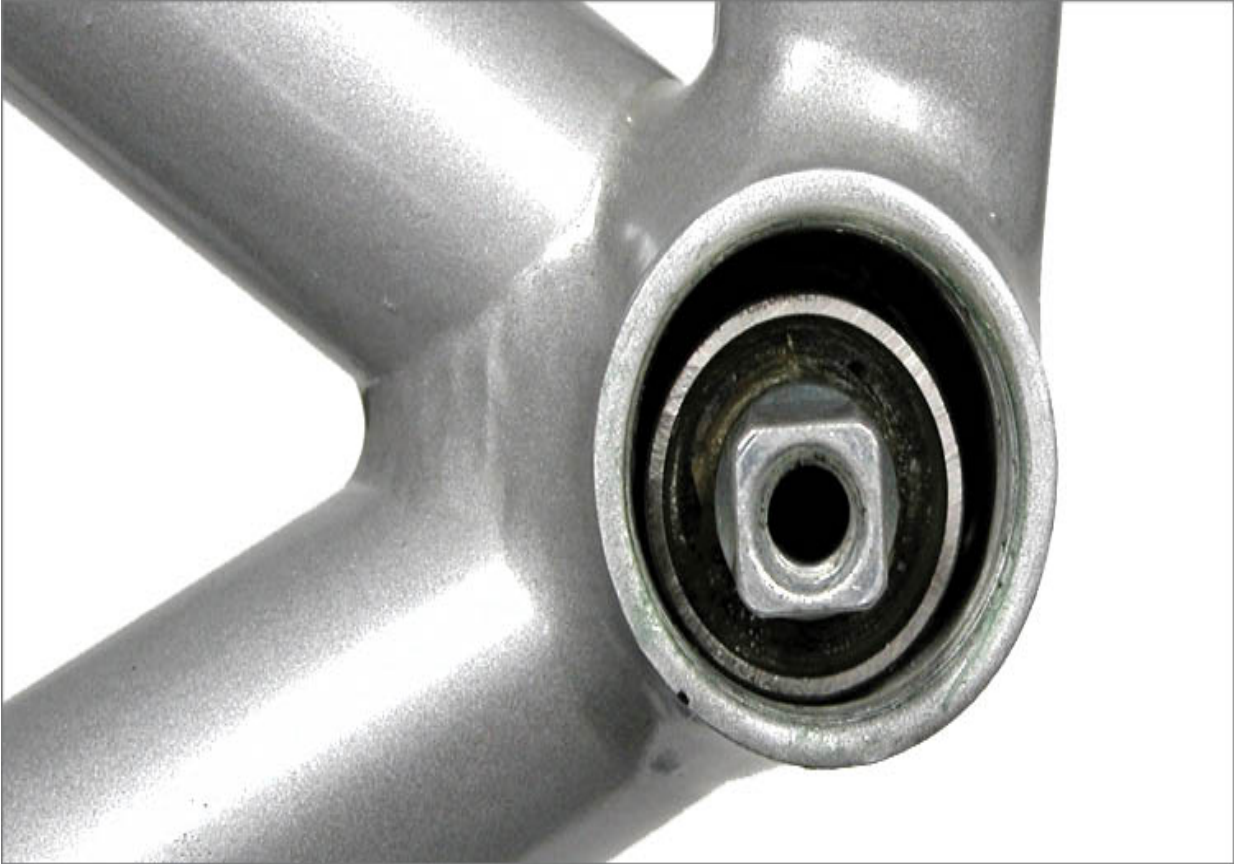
If spindle appears off-center in shell, bottom bracket adaptor is cross-threaded
